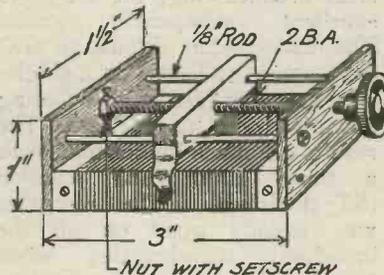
Showing the end pieces in position and method of mounting the runners.
